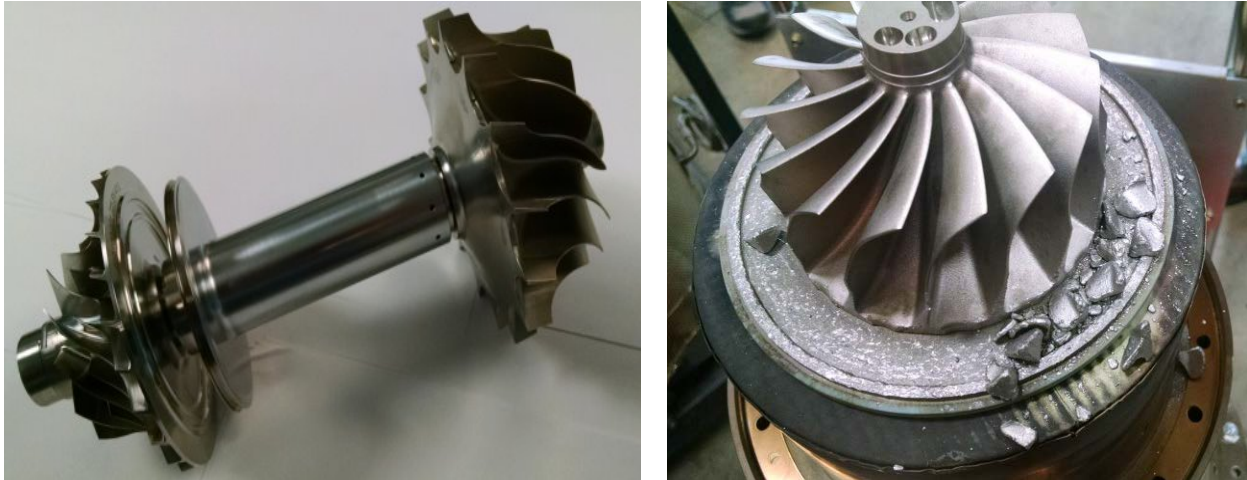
Bi-Metal Turbine Assembly (Left) and Spin Test Results (Right)
